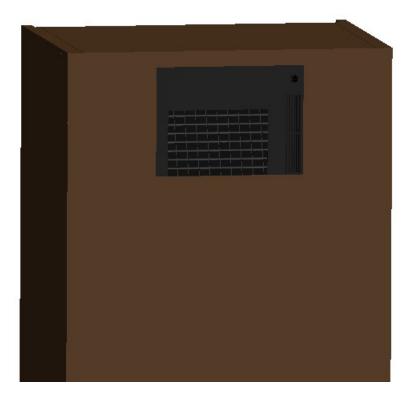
COOLING UNIT MOUNTED (REAR EXHAUST)
